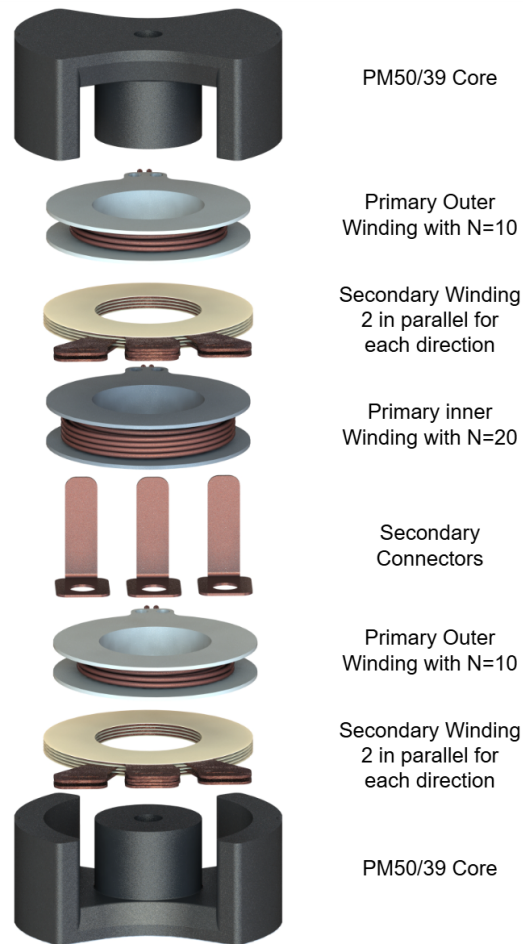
Exploded view of the new transformer design with component breakdown.
